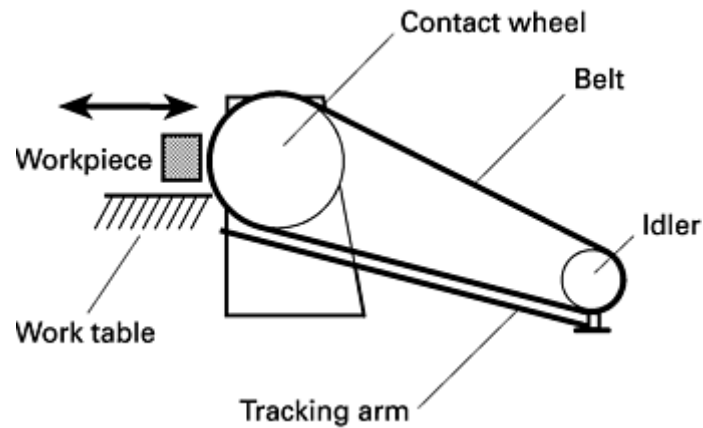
Schematic of backstand grinder having coated abrasive belts for use in off-hand rough grinding operations
